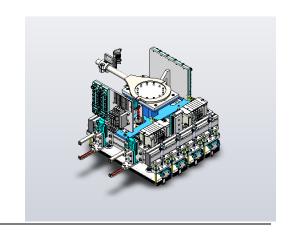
An illustration of the Dunnage Robot end of arm tooling.
